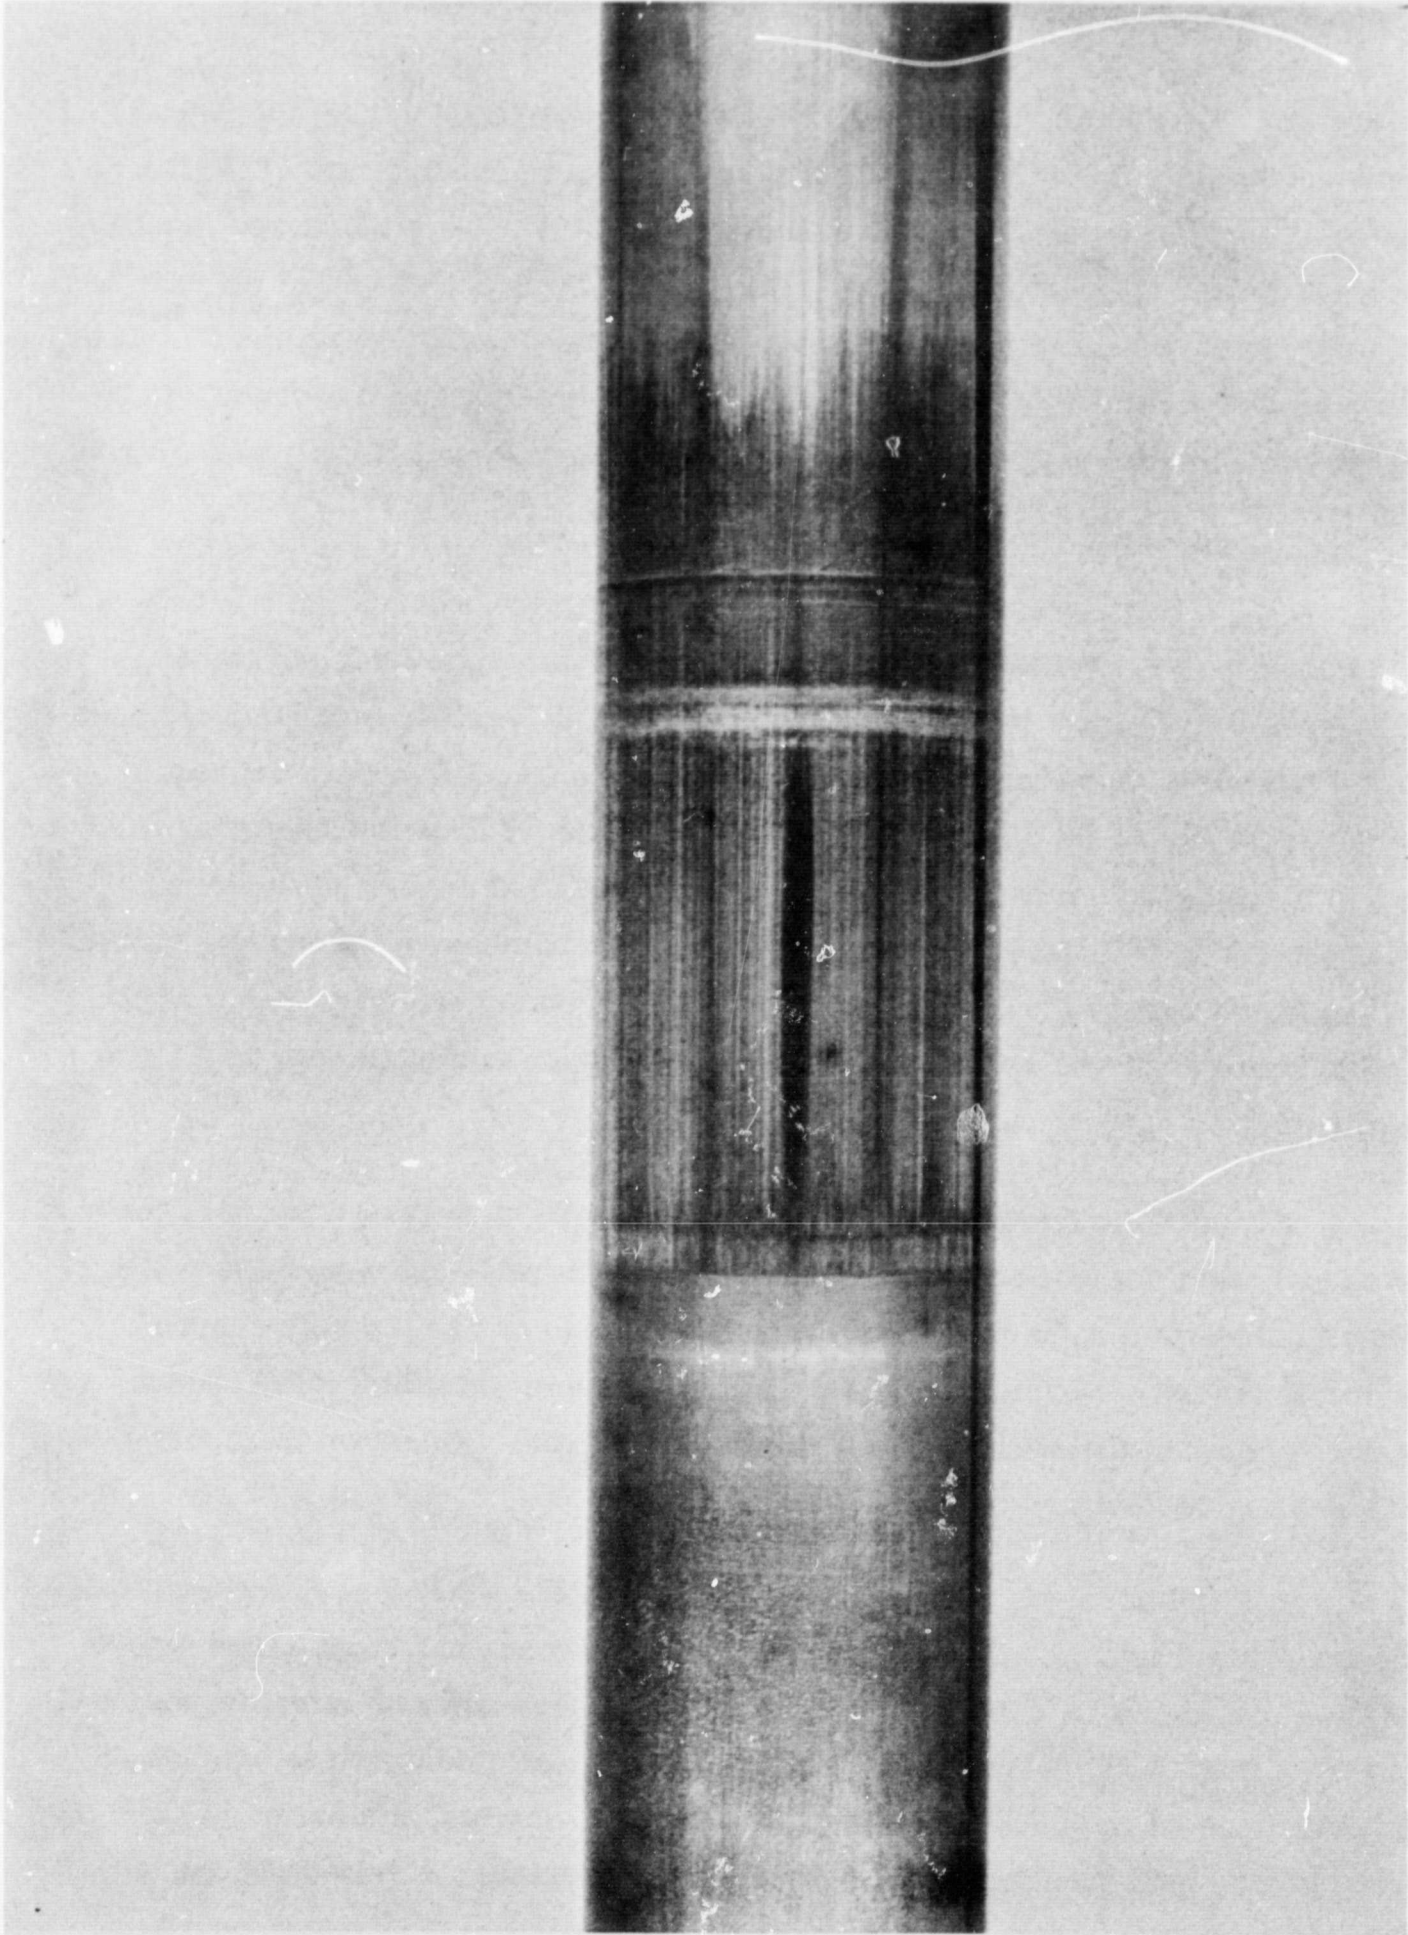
Piston Rod (A-End) One-Inch Cobalt Molybdenum Lip Seal
